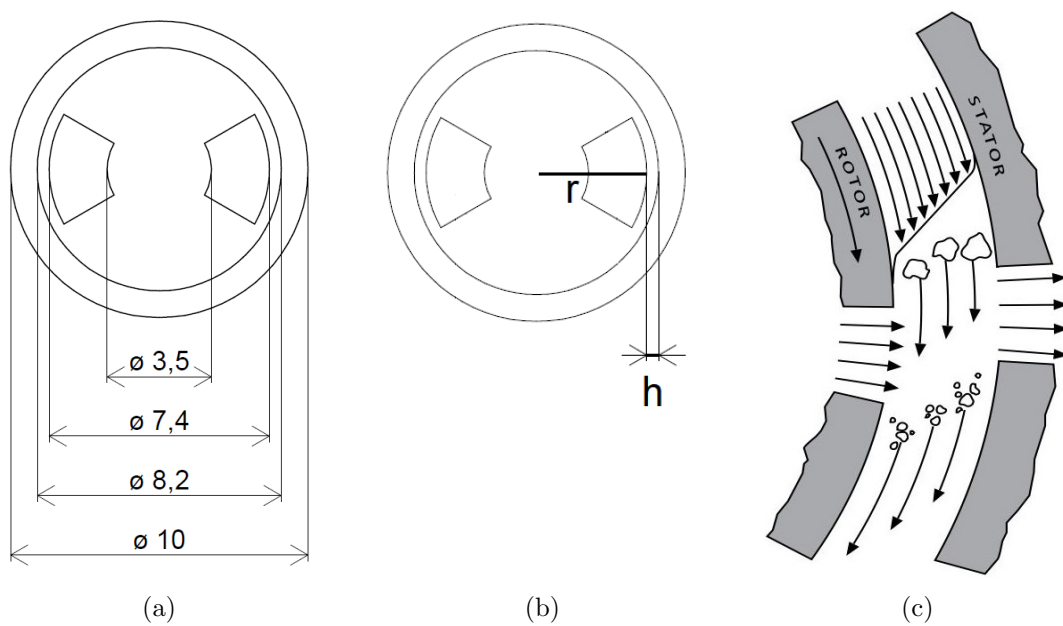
Setup and working principle of the ultra turrax T 25 tool S 25 N-10 G. (a) Dimensions of the tool as viewed from below. (b) Definition of the gap size h (distance between rotor and stator) and the radius of the rotor r . (c) Rotor/stator working principle as described in the manual from IKA [305]. All dimensions are given in mm. Subfigure (c) reproduced from [305] with permission of IKA-Werke GmbH & Co. KG, Staufen, Germany.
